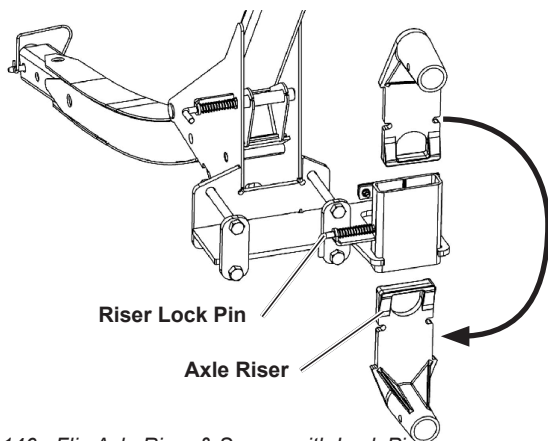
Flip Axle Riser & Secure with Lock Pin
